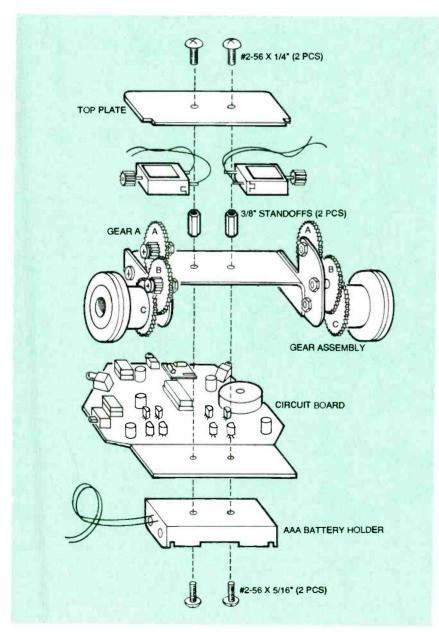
THE GEAR ASSEMBLY mounts to the PC board as shown. The two screws on the top plate hold the two motors in place.
